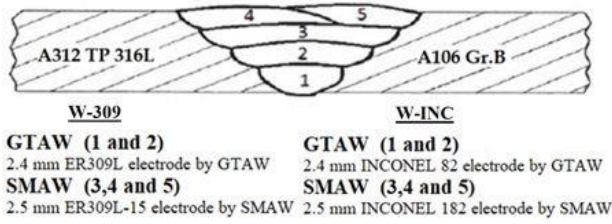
Base metals, electrodes, welding methods and welding passes used in W-309 and W-INC coded welding processes
